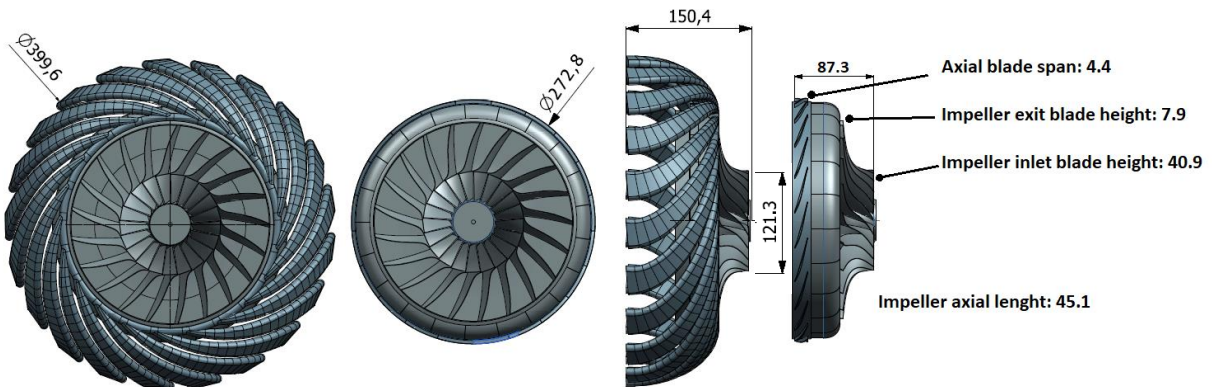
Final CC compressor and first CRC compressor design (all dimensions in mm)
